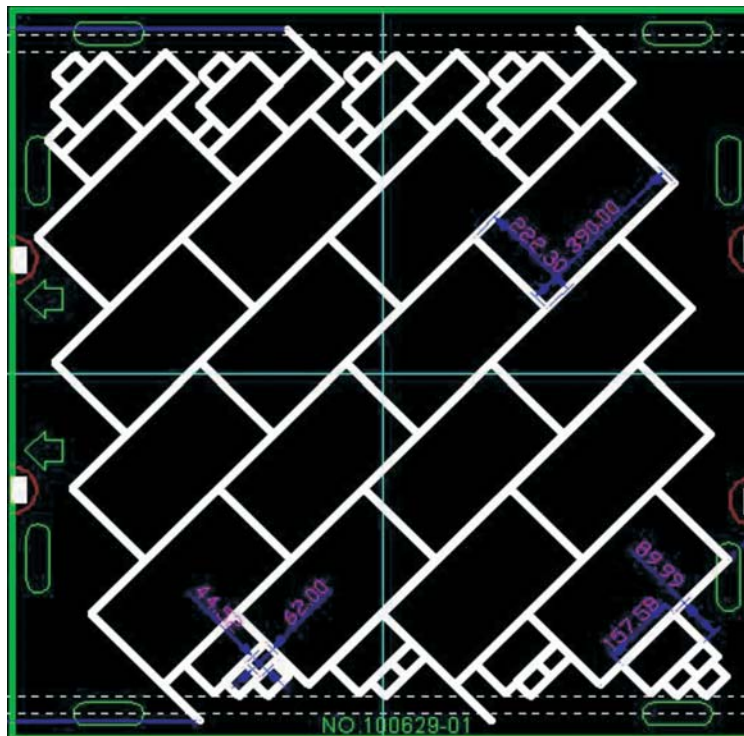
Knife Mold of Polarizer Cutting (3 in 1)
